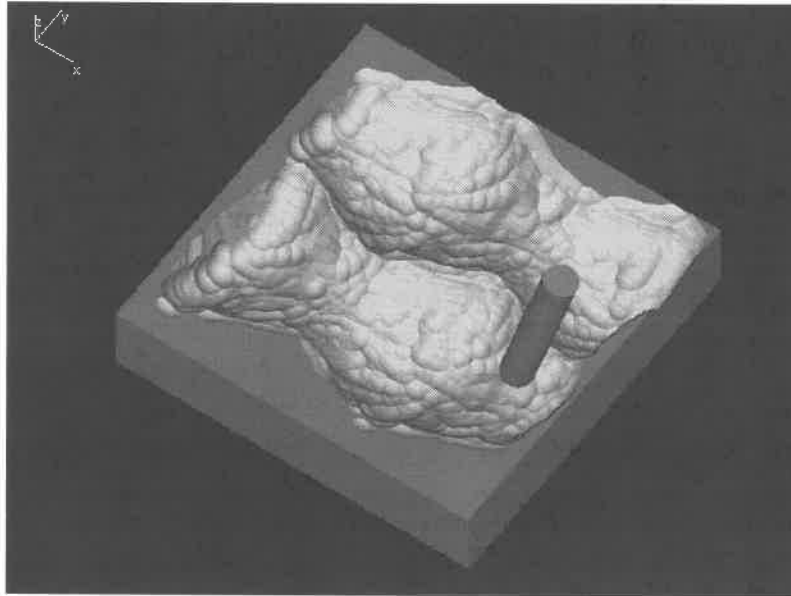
Machined Surface with Machining Errors (Exaggerated by 100 times)
